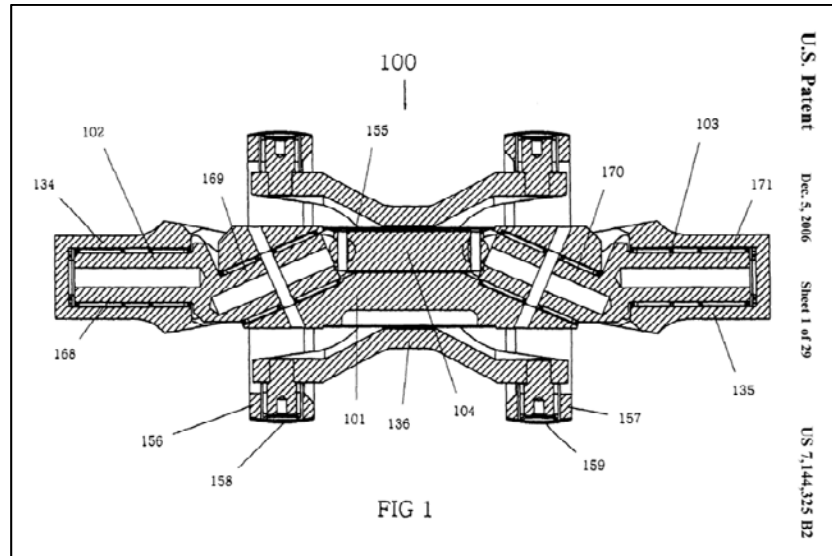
Cornay® CVX-50 Joint Patent Drawing
